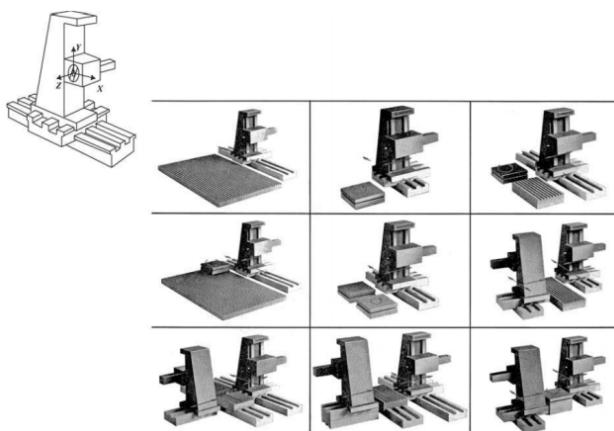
Horizontal machine tool with modular design (Scharmann Co.)
